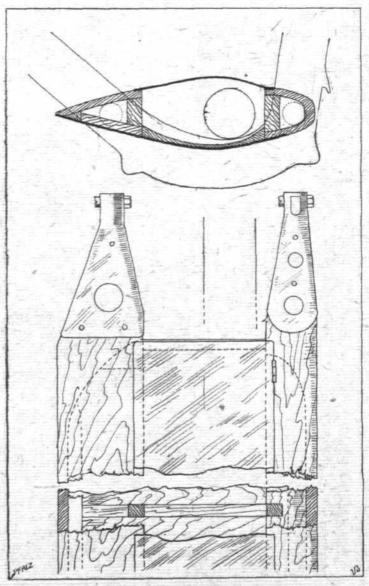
Sectional view of the stream-lining of the axle on the Pfalz biplane.
